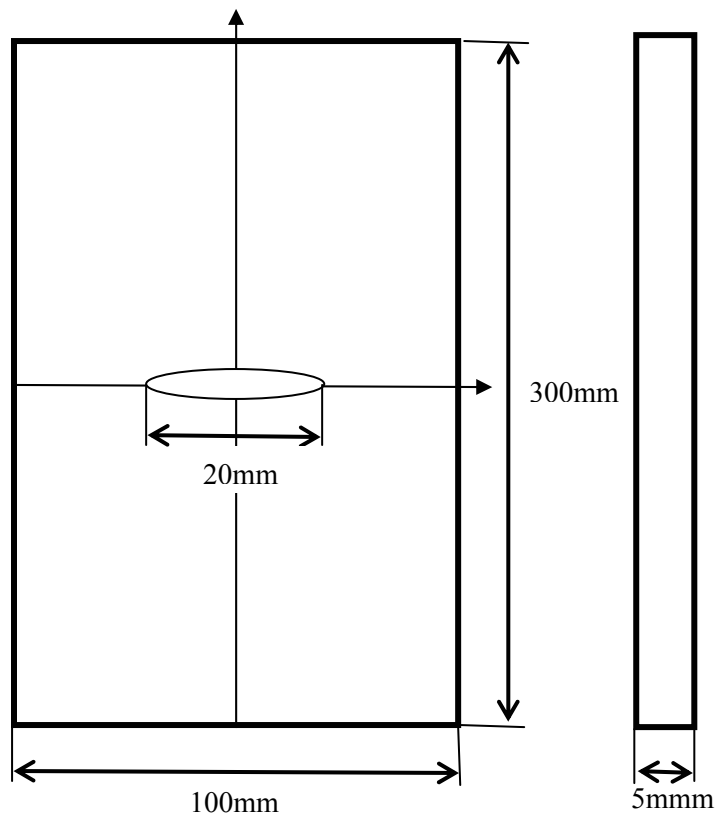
Central through crack specimen made of 350WT steel (Ref. [63])
